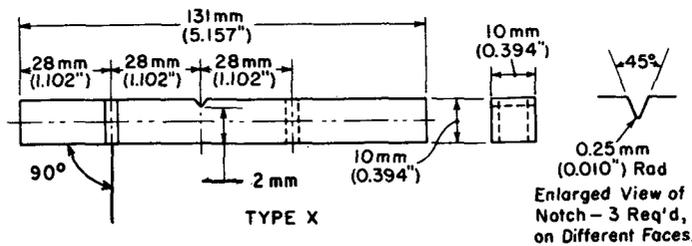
Charpy (Simple Beam) Impact Test Specimens for Metal Powder Structural Parts
